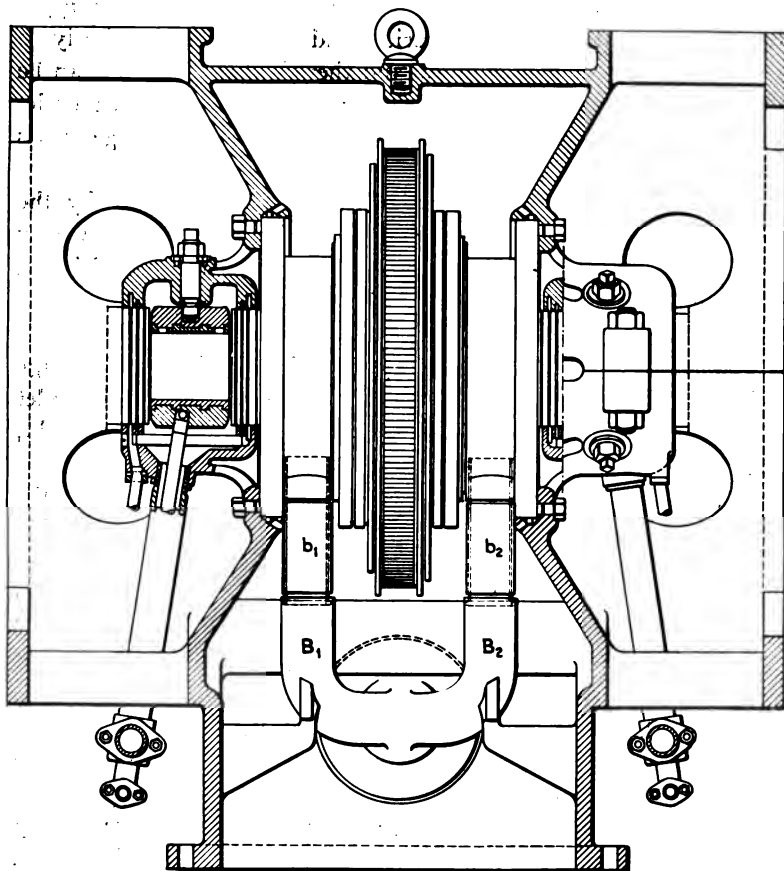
Wulsty Castle*: Longitudinal Section of 1,000 Kilowatt Turbine eleven in the bearing surface on which it rests. This allows for very accurate adjustment of bearing without too fine a threading of adjusting screws.
